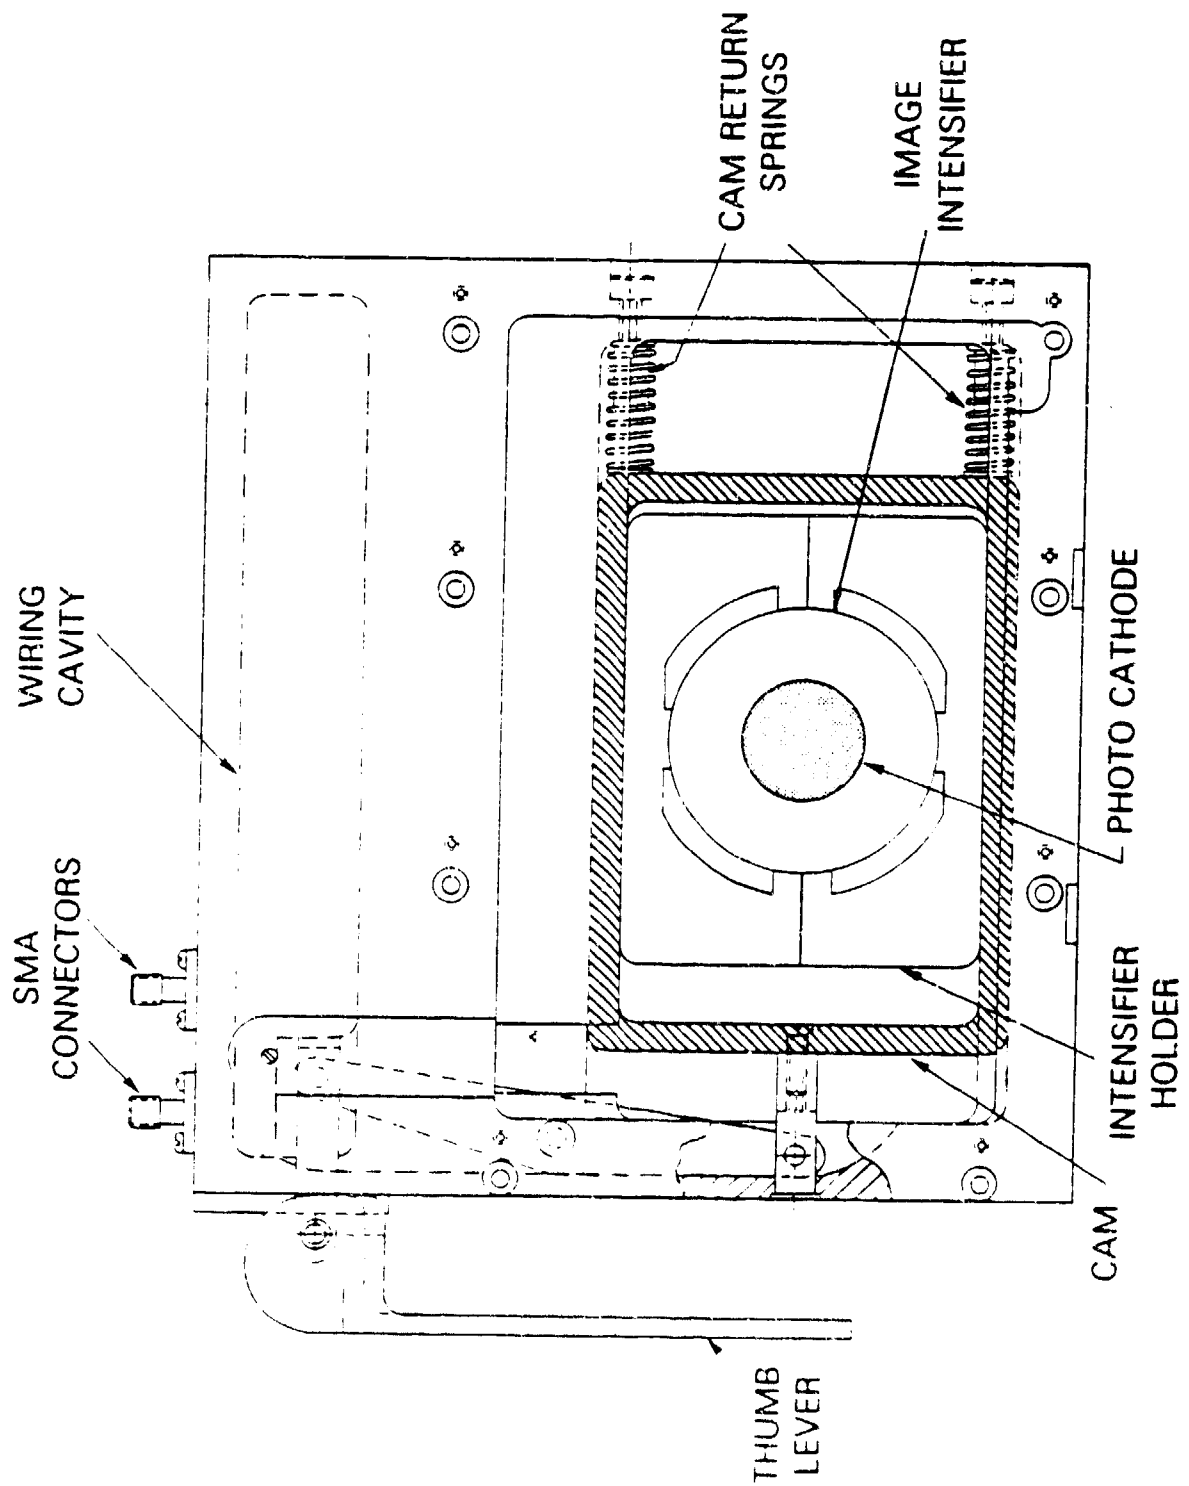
Assembly drawing of the intensifier tube housing and transport mechanism viewed from the camera lens side
